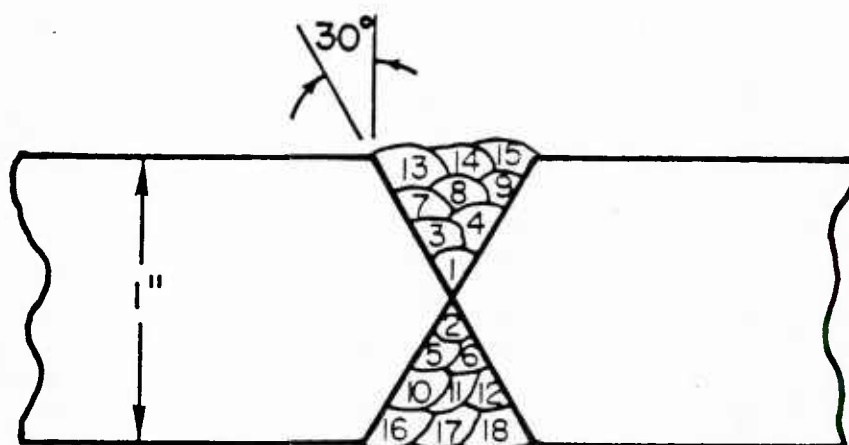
CROSS SECTION OF AN 18-PASS BUTT WELD
